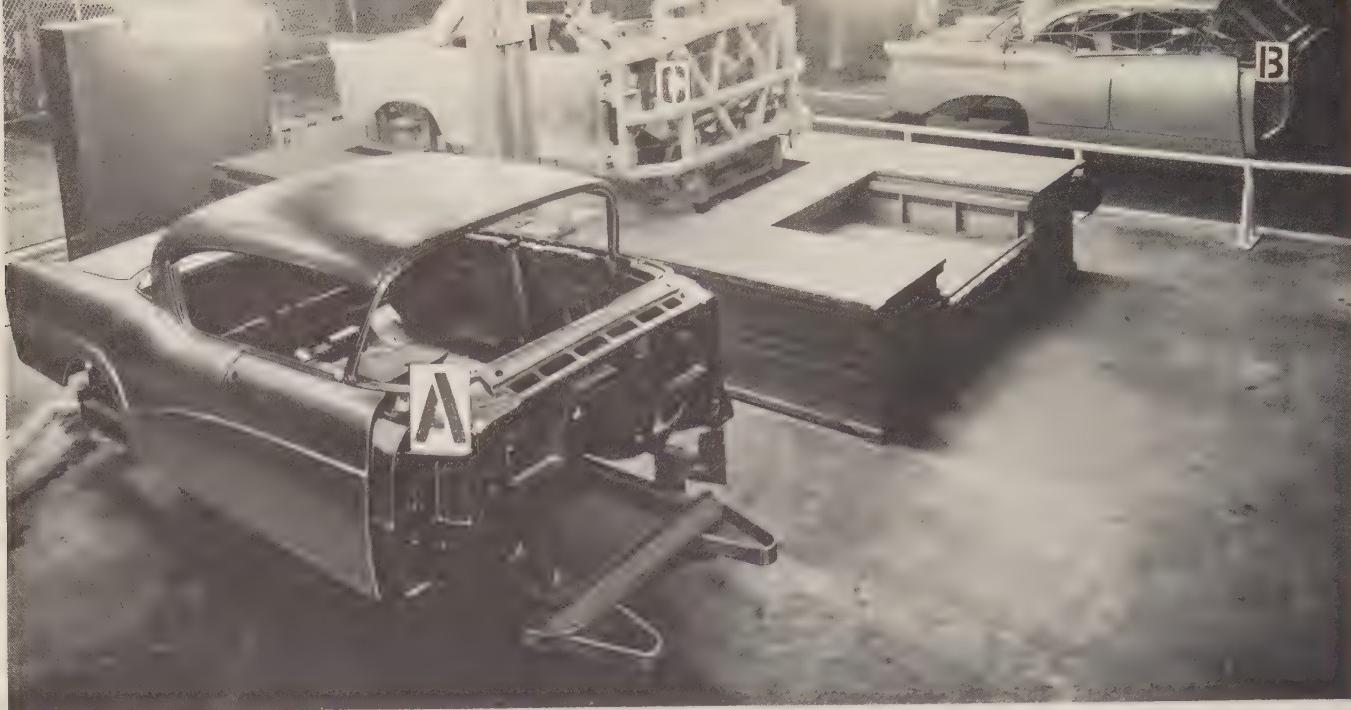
Three body shells, as used in certain models of 1957 Buick (A), Oldsmobile (B), and Pontiac (C) passenger cars, are shown in a body checking area. The Pontiac body shell is shown positioned on a "dry dock" of a dimensional checking bridge. This equipment is used to make an accurate check of body shell dimensions.
